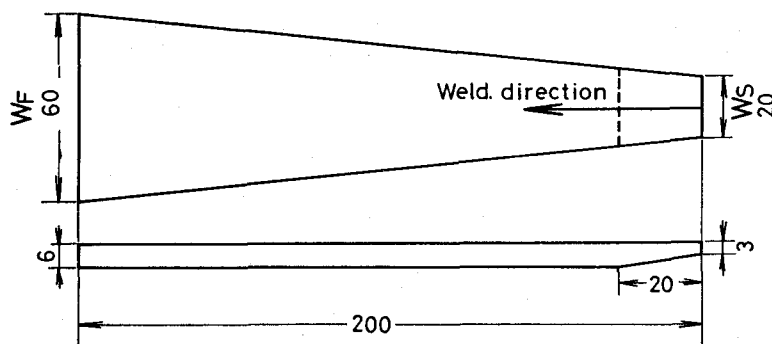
Shape and dimension of Fan-shaped cracking test specimen.
